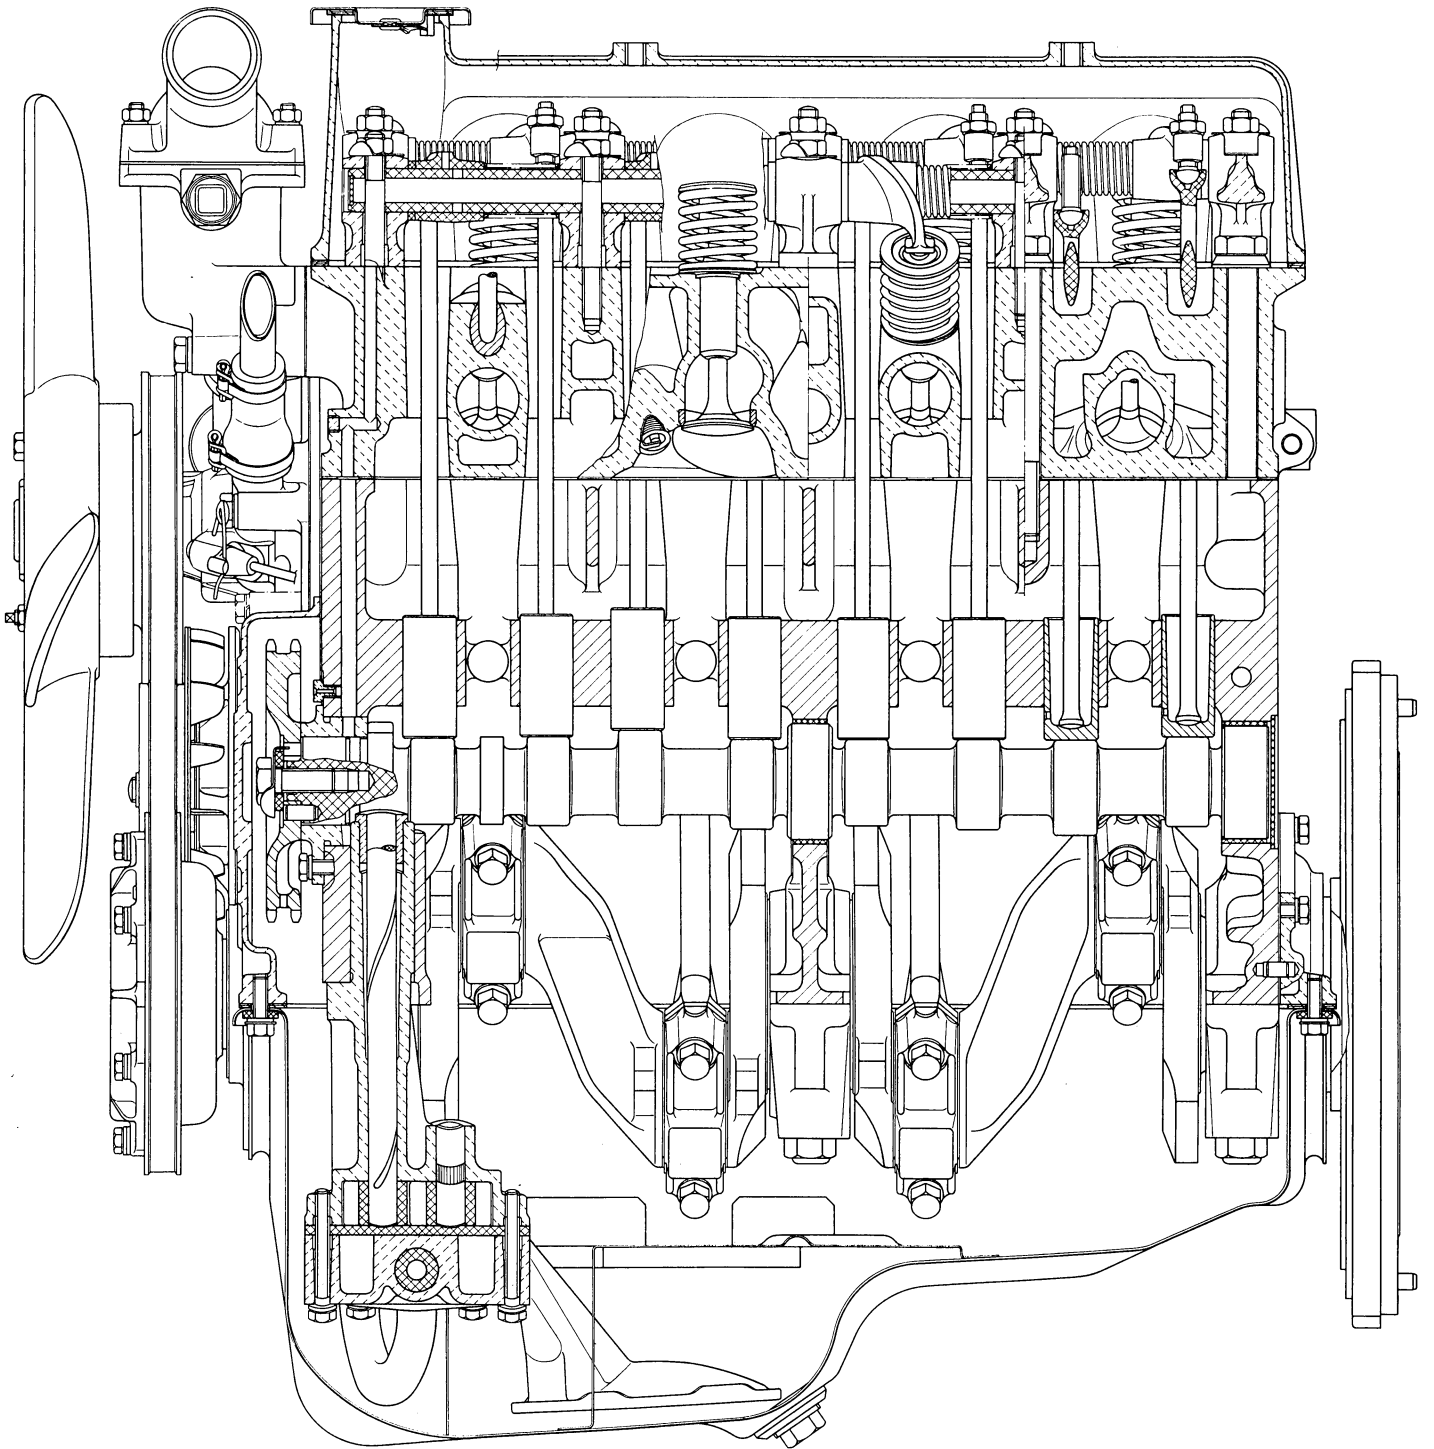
Side sectional view of engine 115 C.005 across camshaft, rocker shaft and oil pump.
